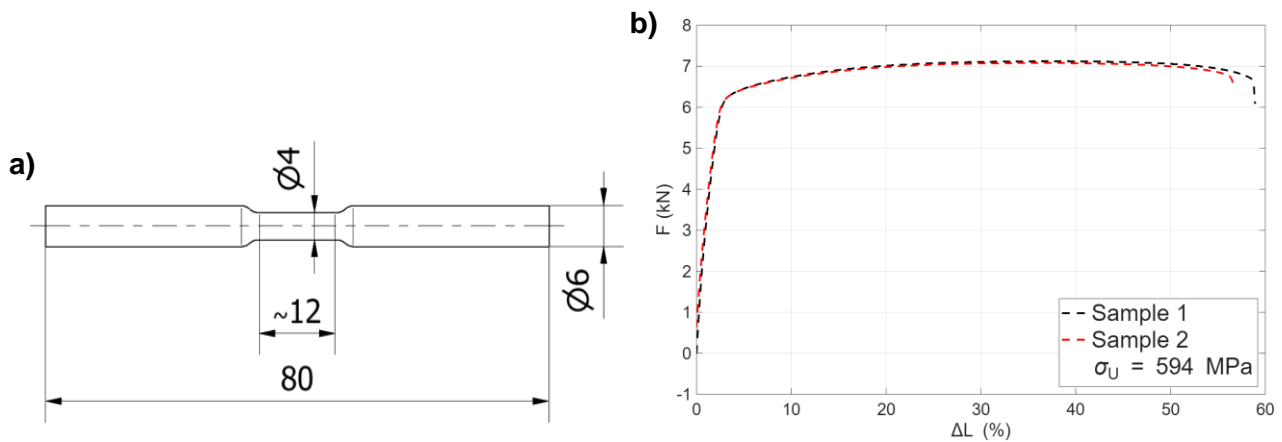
a) Specimen geometry, b) Tensile test of 316L material
